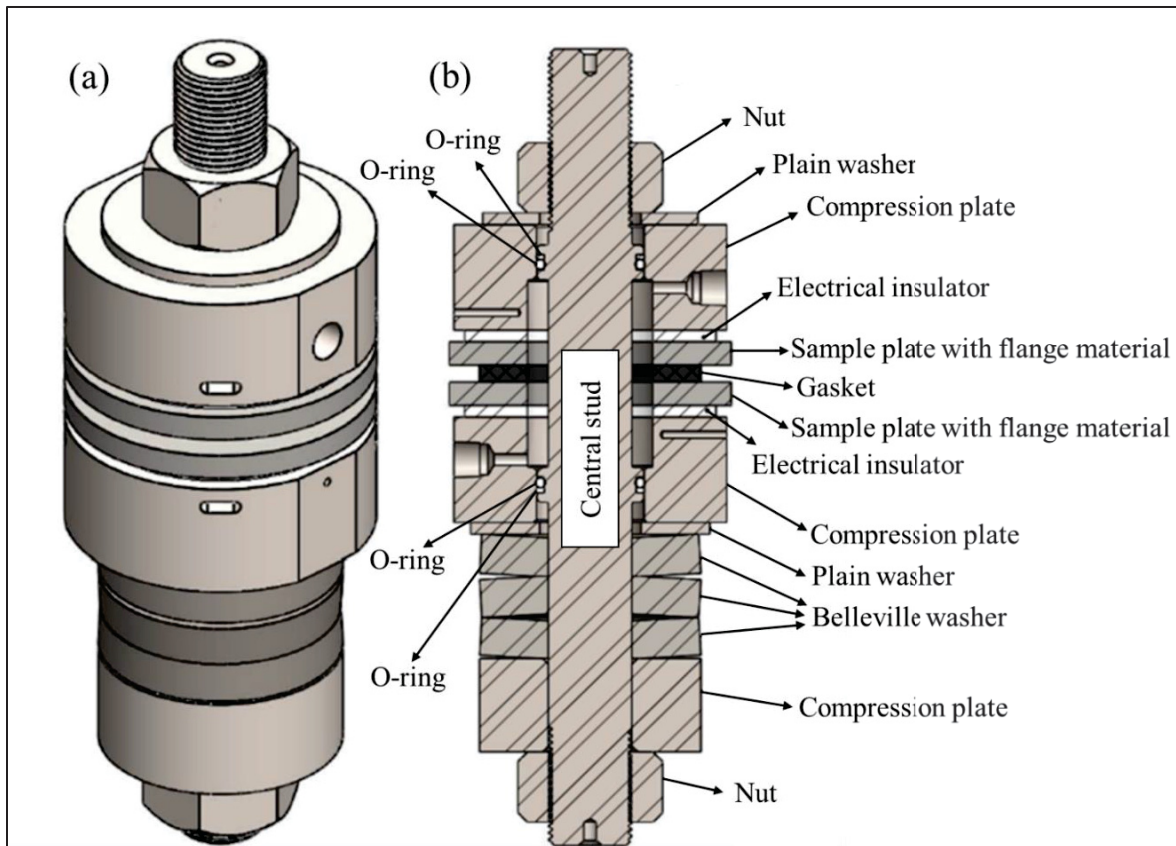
Test fixture (a) 3D view (b) cross section view and labelling of each item
